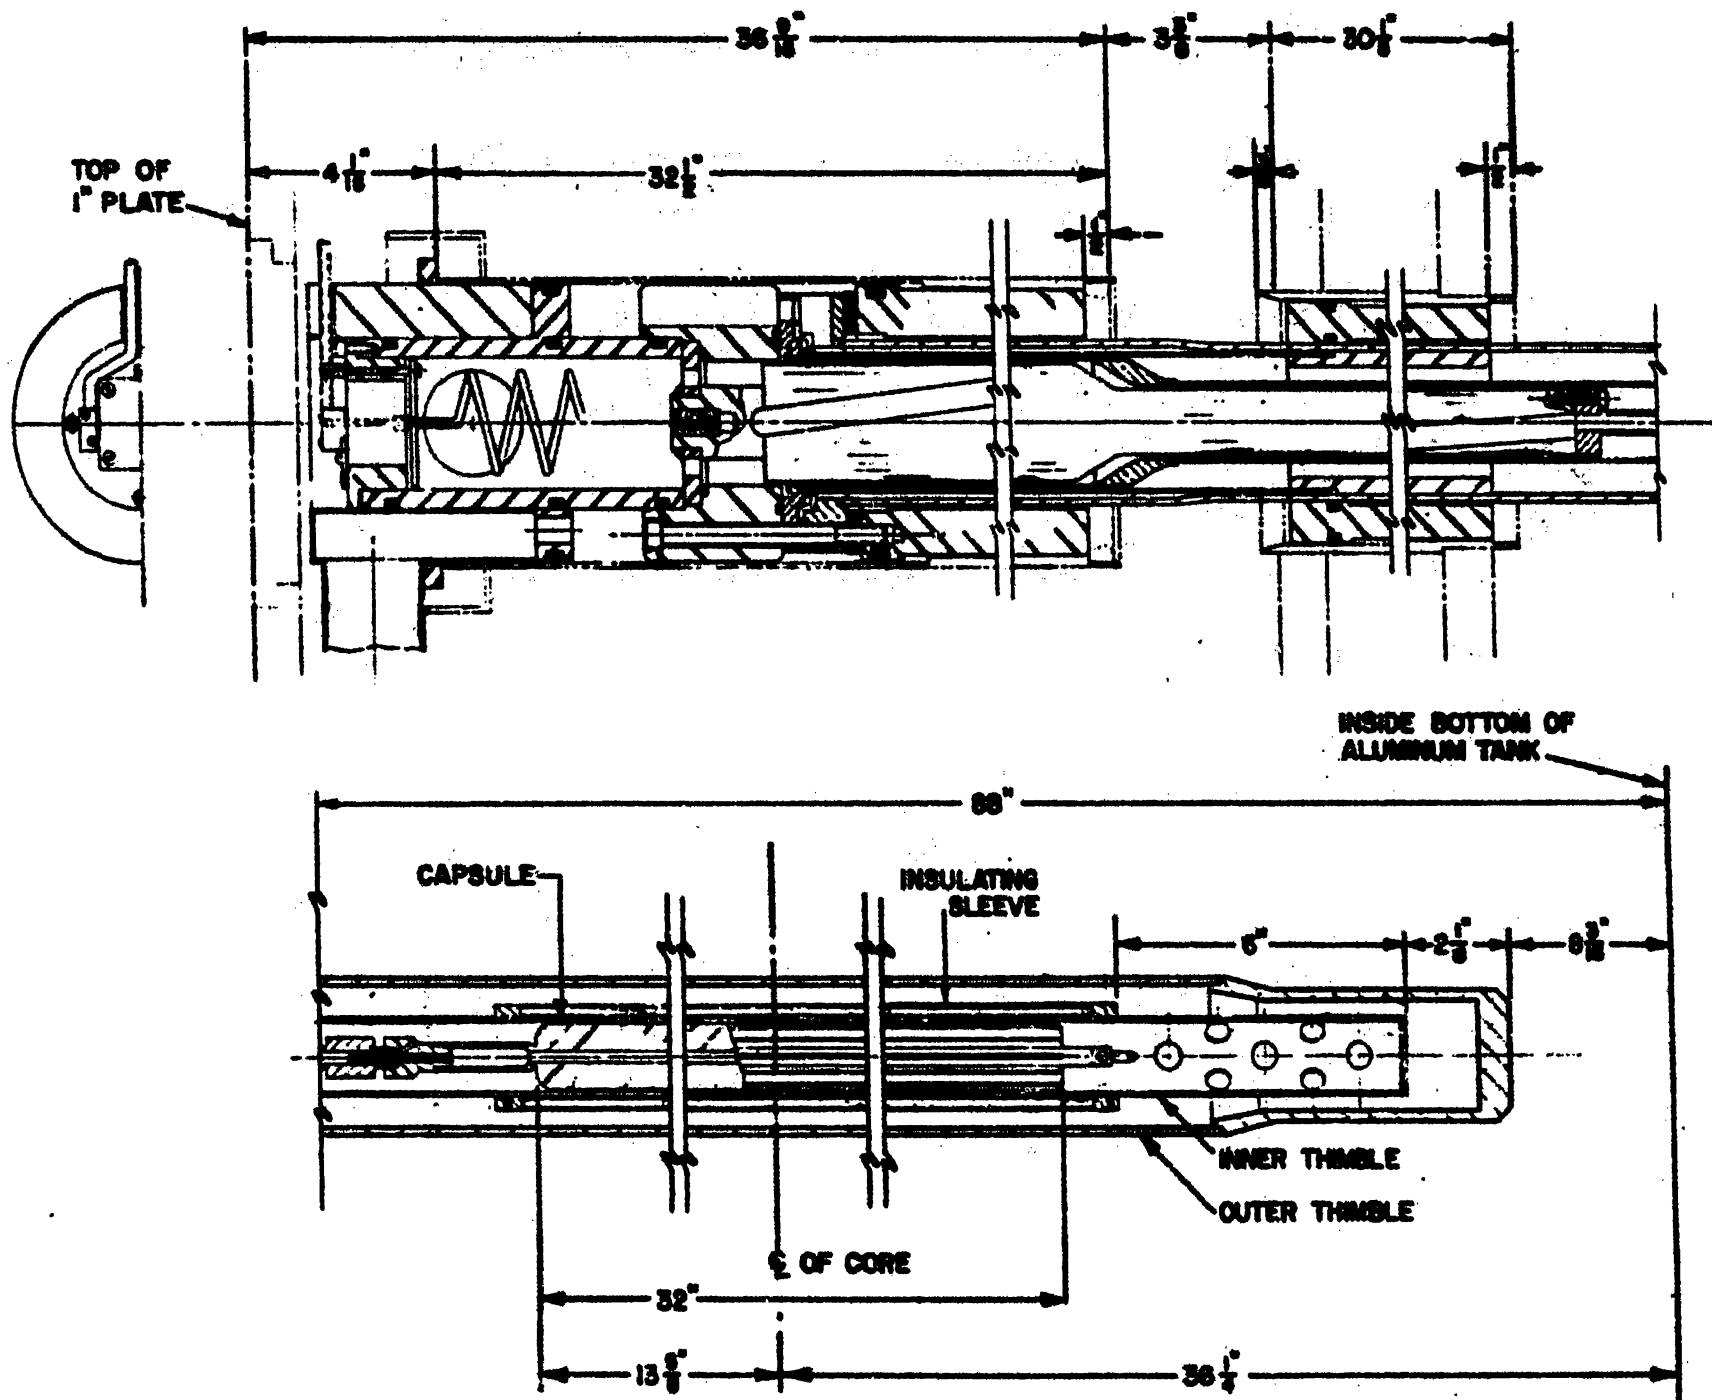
THIMBLE ASSEMBLY FOR HOLES 26 & 27
